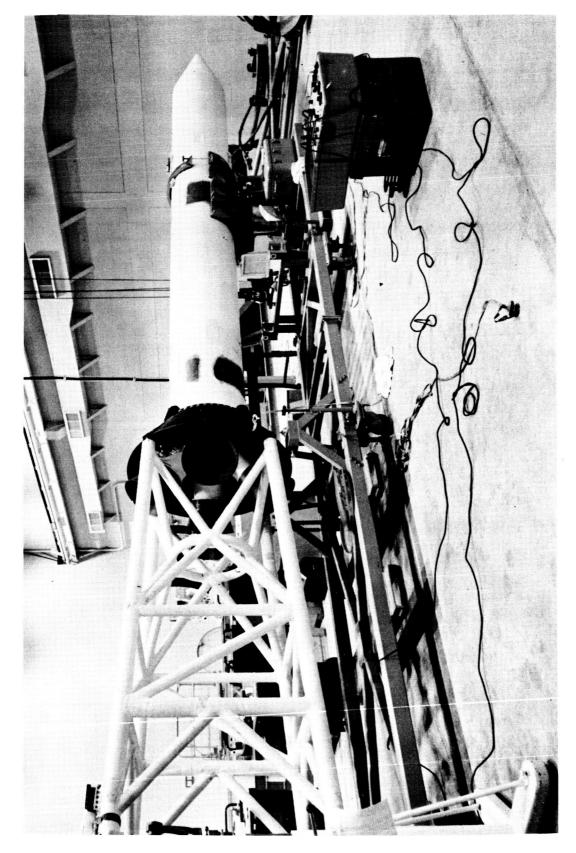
Launch Escape System (LES) for BP-15 in weight and balance fixture in the Pyrotechnic Installation Building at Merritt Island Launch Area (MILA), Florida on July 24, 1964. The LES was the first flight item to be checked out at MILA.
